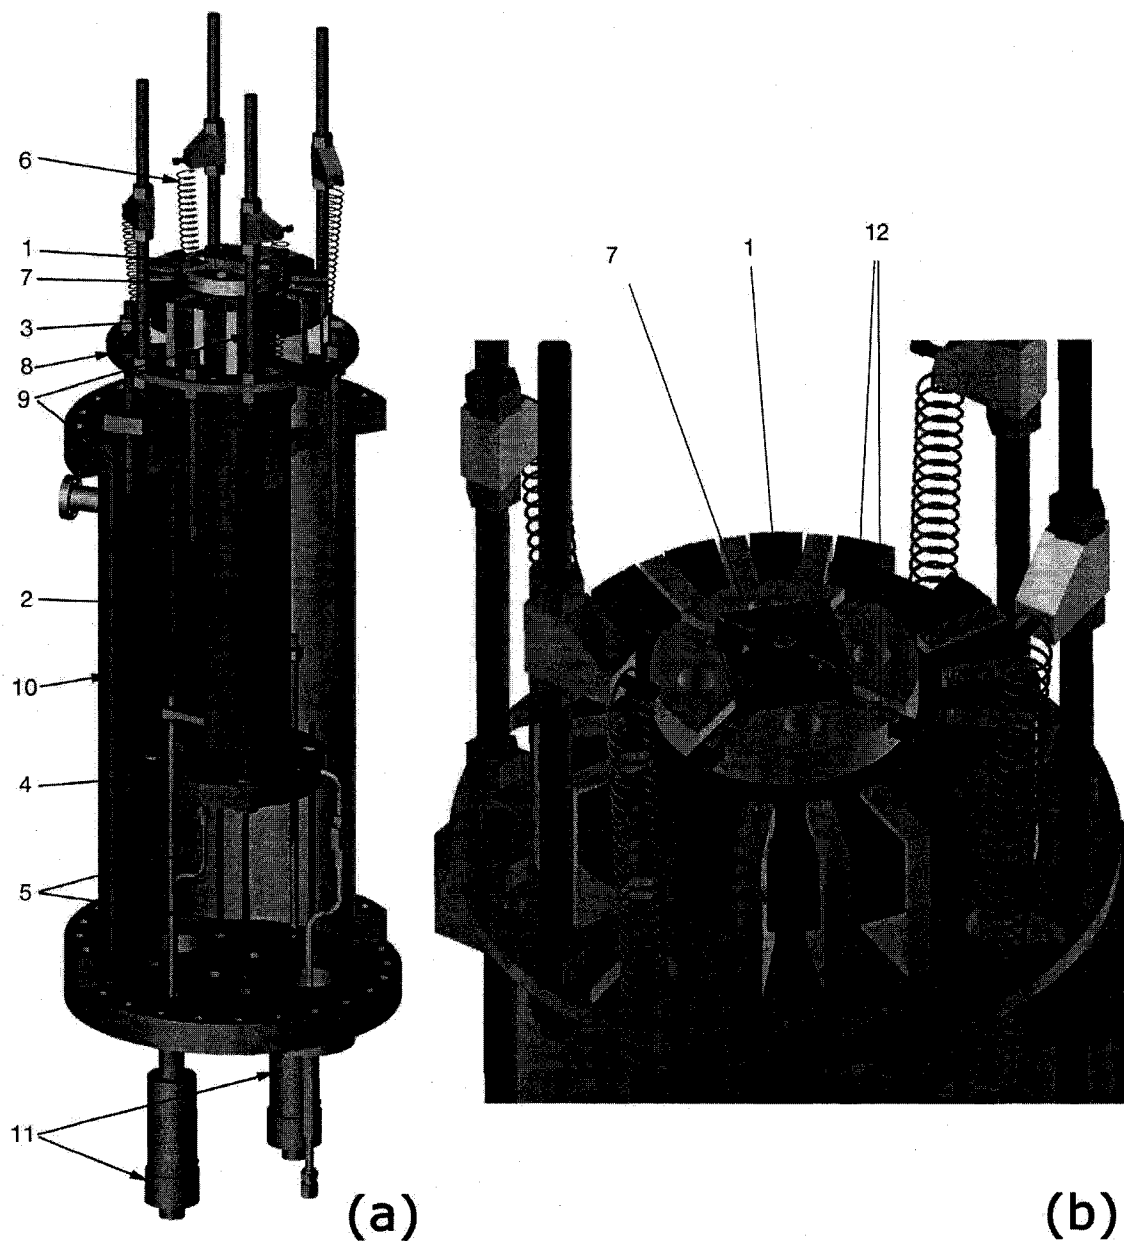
Flange-on STM cryogenics and vibration isolation assembly: (a) all parts view and (b) inset of the sample holder area; (1) sample holder, (2) Al cold reservoir, (3) Sm-Co magnet assembly, (4) cold finger, (5) coolant feed-through, (6) springs, (7) sample holder Cu base, (8) St-St magnets ring holder, (9) threaded rods, (10) UHV chamber, (11) linear motion manipulators, (12) flat springs providing electrical contact for the sample's filament and the C-type thermocouple.
